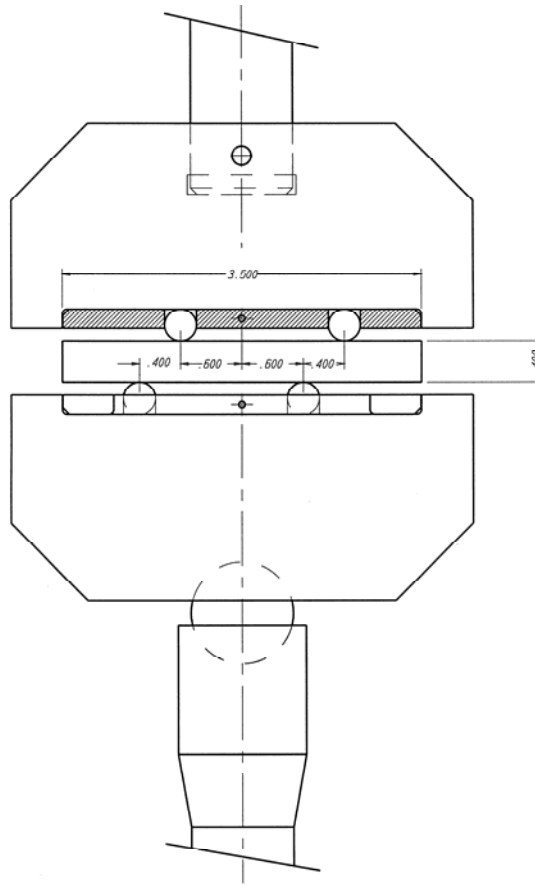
Schematic of the high-temperature asymmetric four-point bend fatigue test fixture designed at SwRI®.
